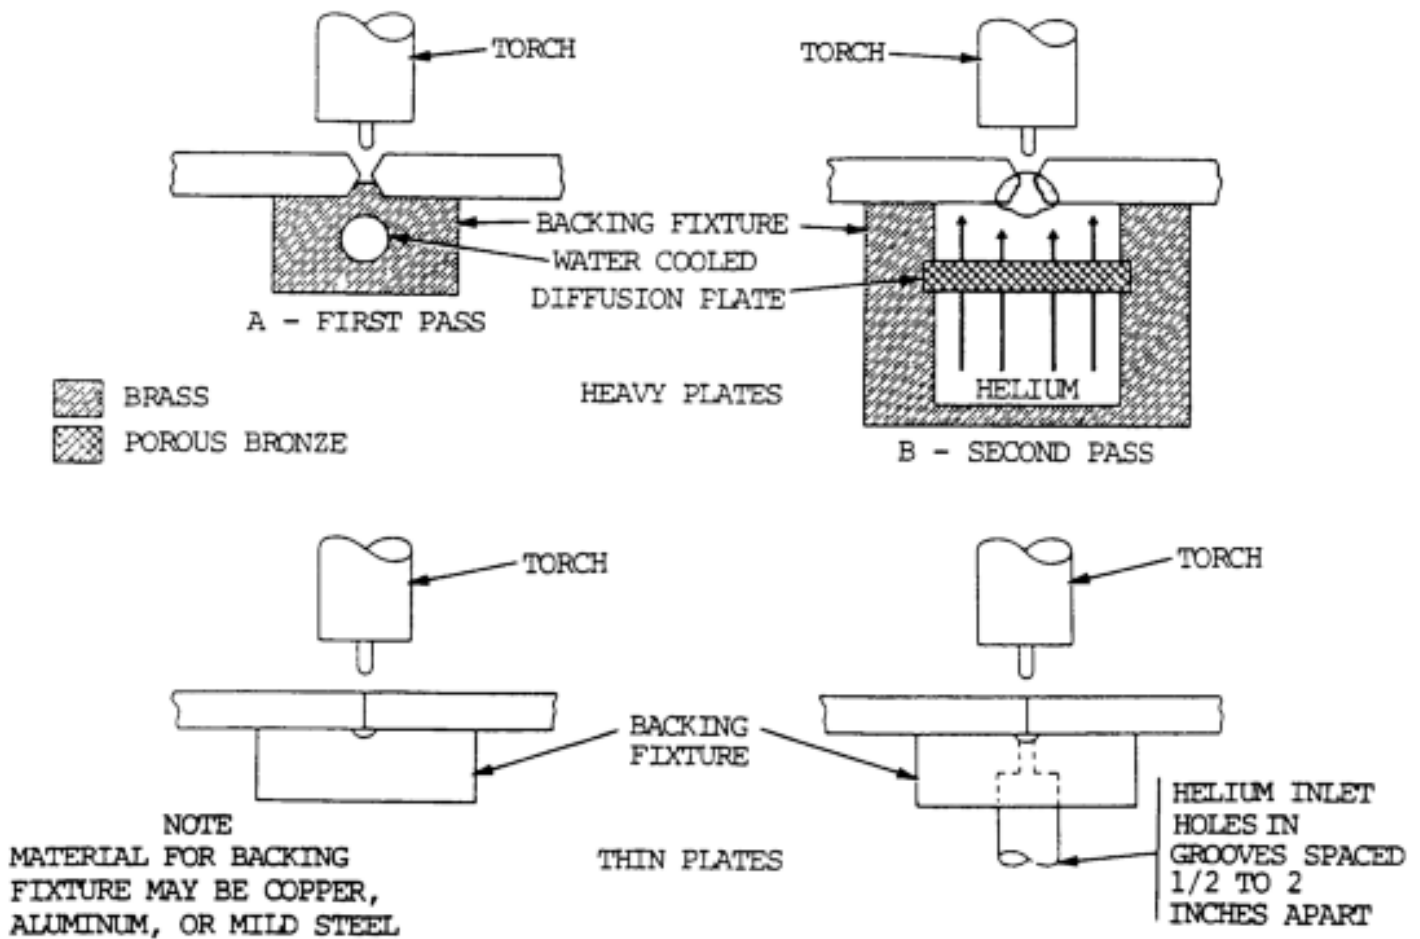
Backing fixtures for butt welding heavy plate and thin sheet.
